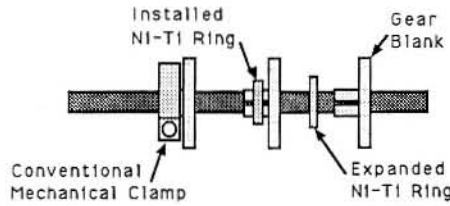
Locating of shaft mounted components with Ni-Ti fastener rings
